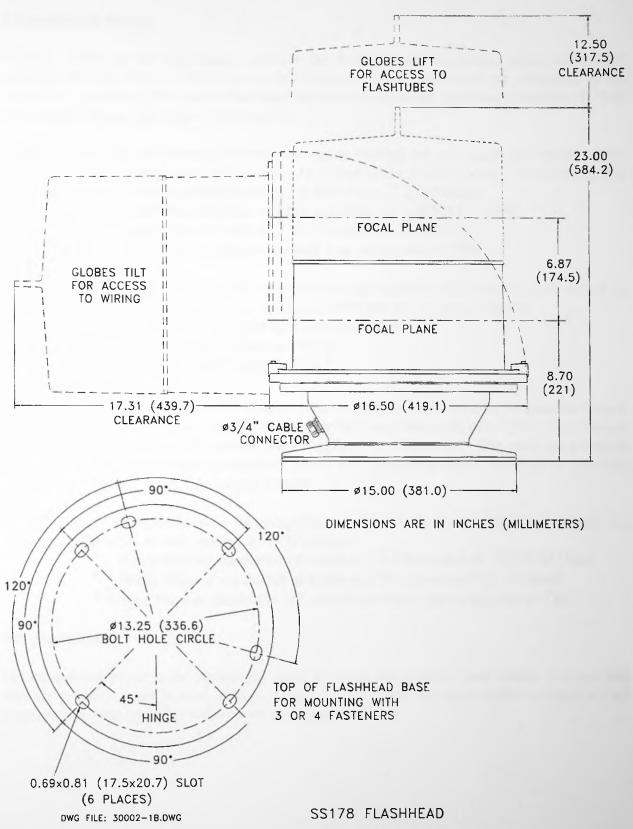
OUTLINE AND MOUNTING DIMENSIONS
